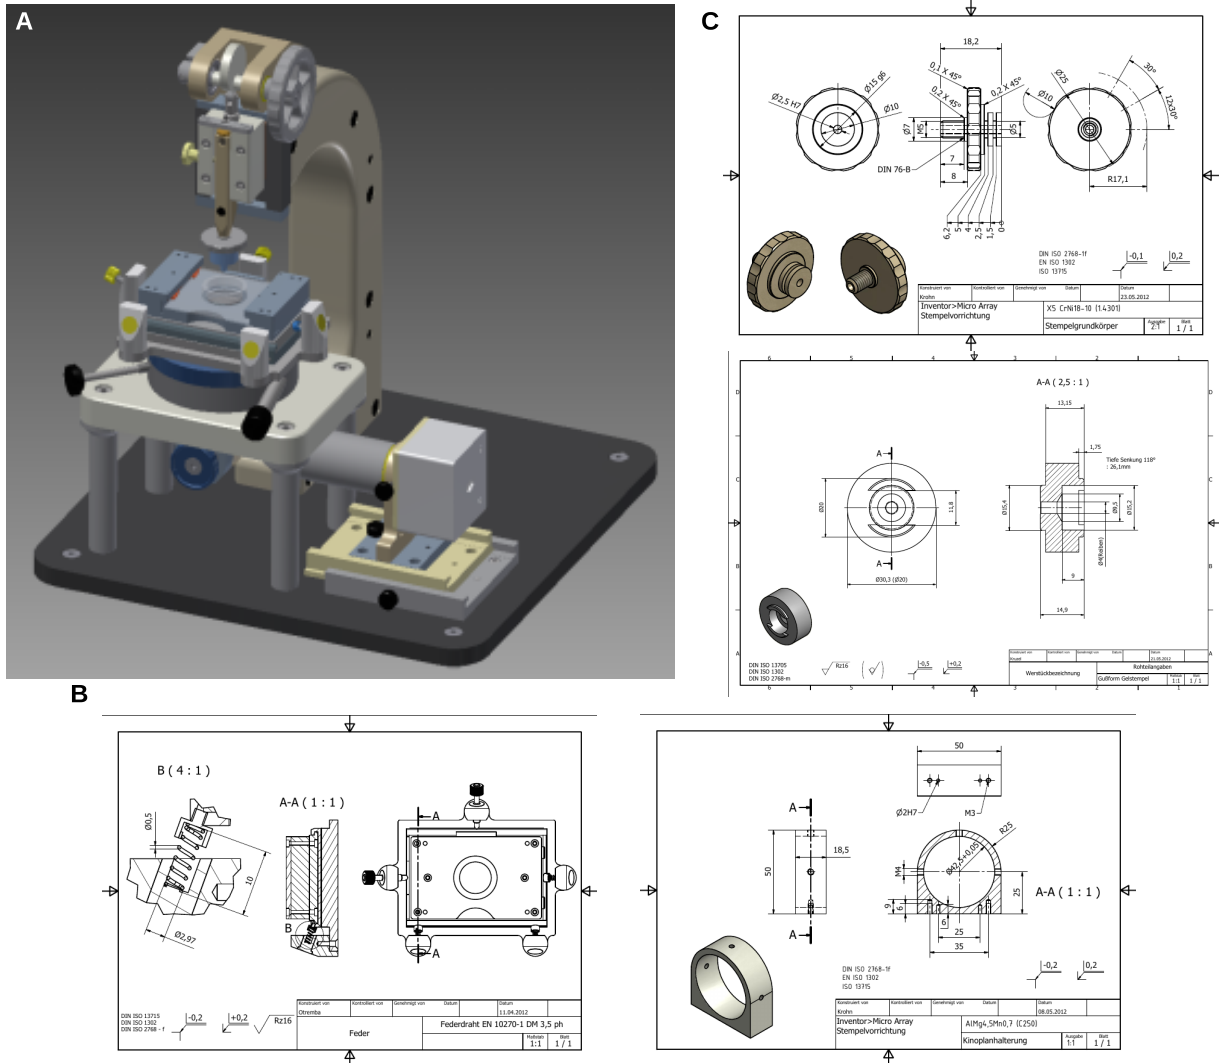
Examples of the online supplemental material. A A rendering of the CAD construction sheets. B A few example construction sheets of the stamping machine. C A few example construction sheets of the stamp holders.
